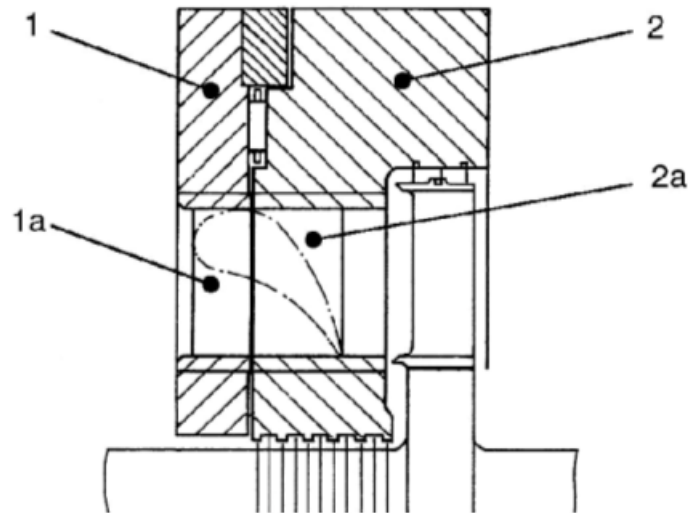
Schematic of Axial Rotary Valve for Throttling [5]
